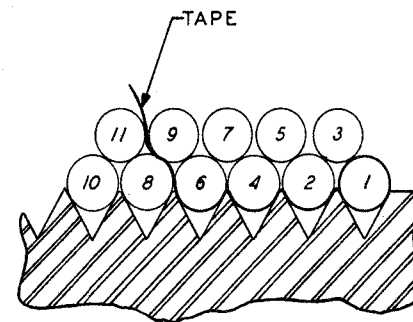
DETAIL SHOWING METHOD OF TAPING START & END OF WINDING AND SEQUENCE OF DOUBLE BANK WINDING.
